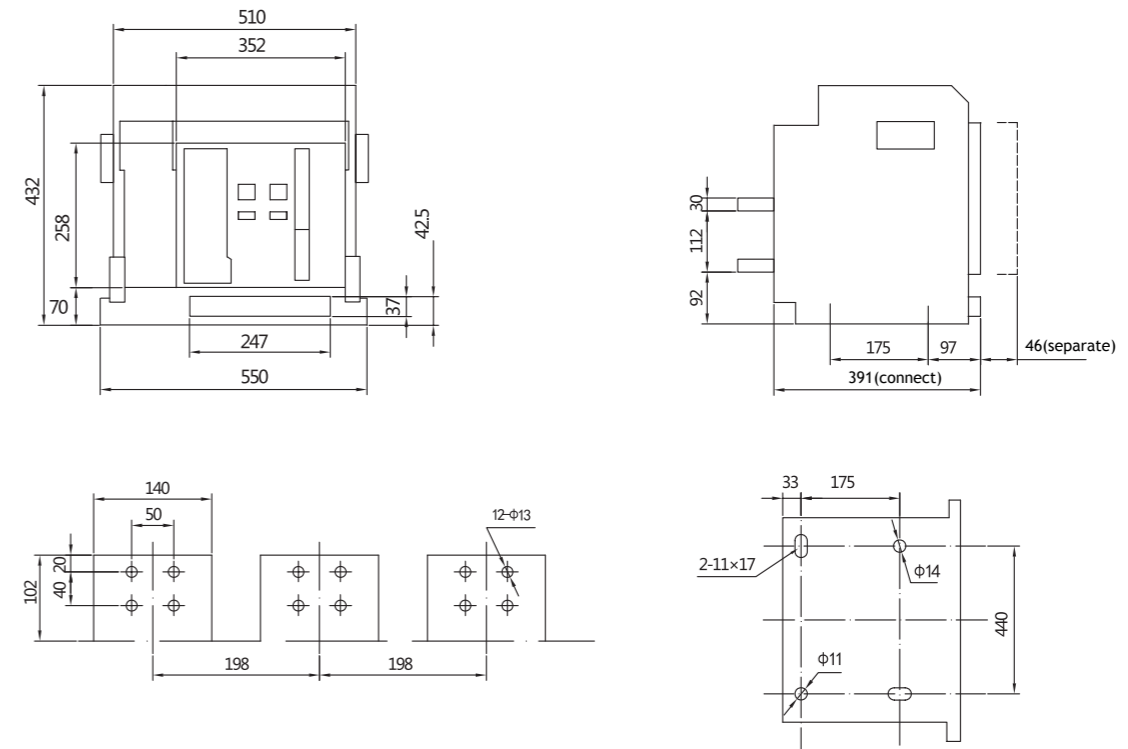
RDSW6-4000/4P drawer install and shape dimension
